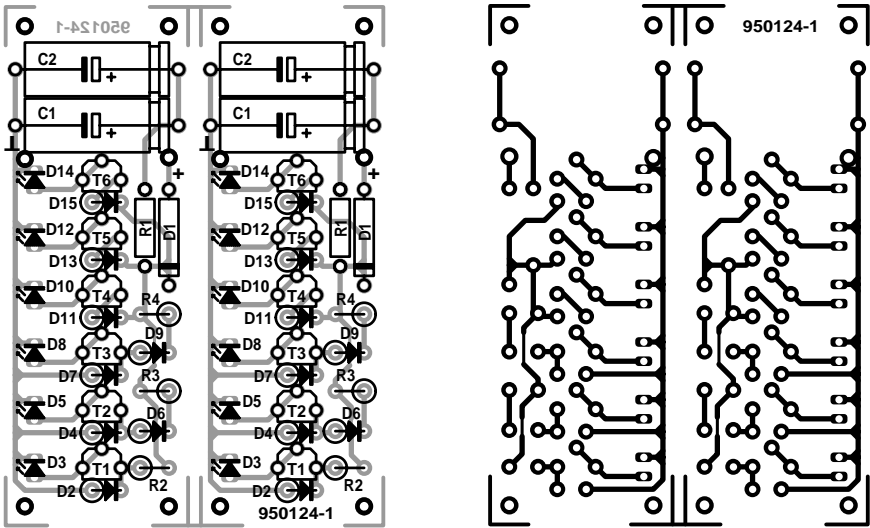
The printed-circuit board for the passive VU meter must be cut into two before any assembly work is begun.
